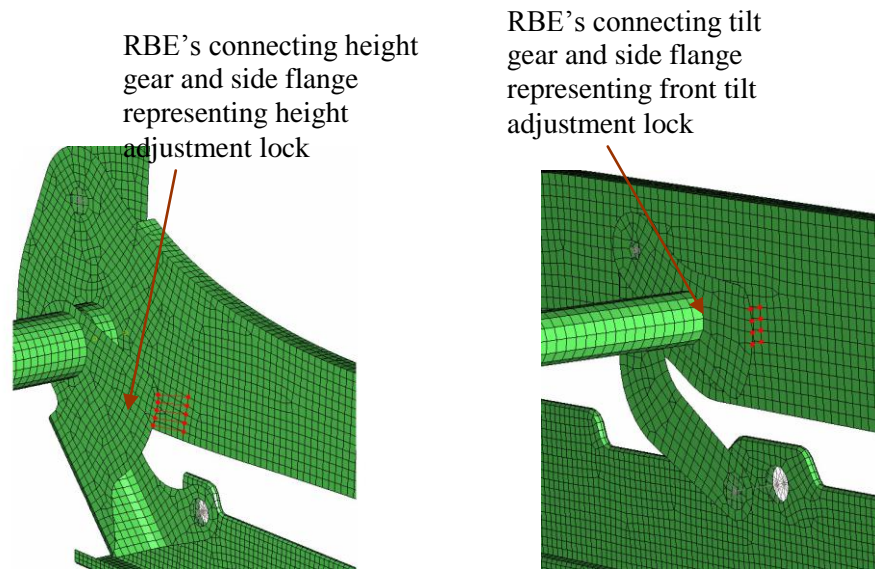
Finite Element Model of (Left) Height Gear Mechanism, (Right) Tilt Gear Mechanism
